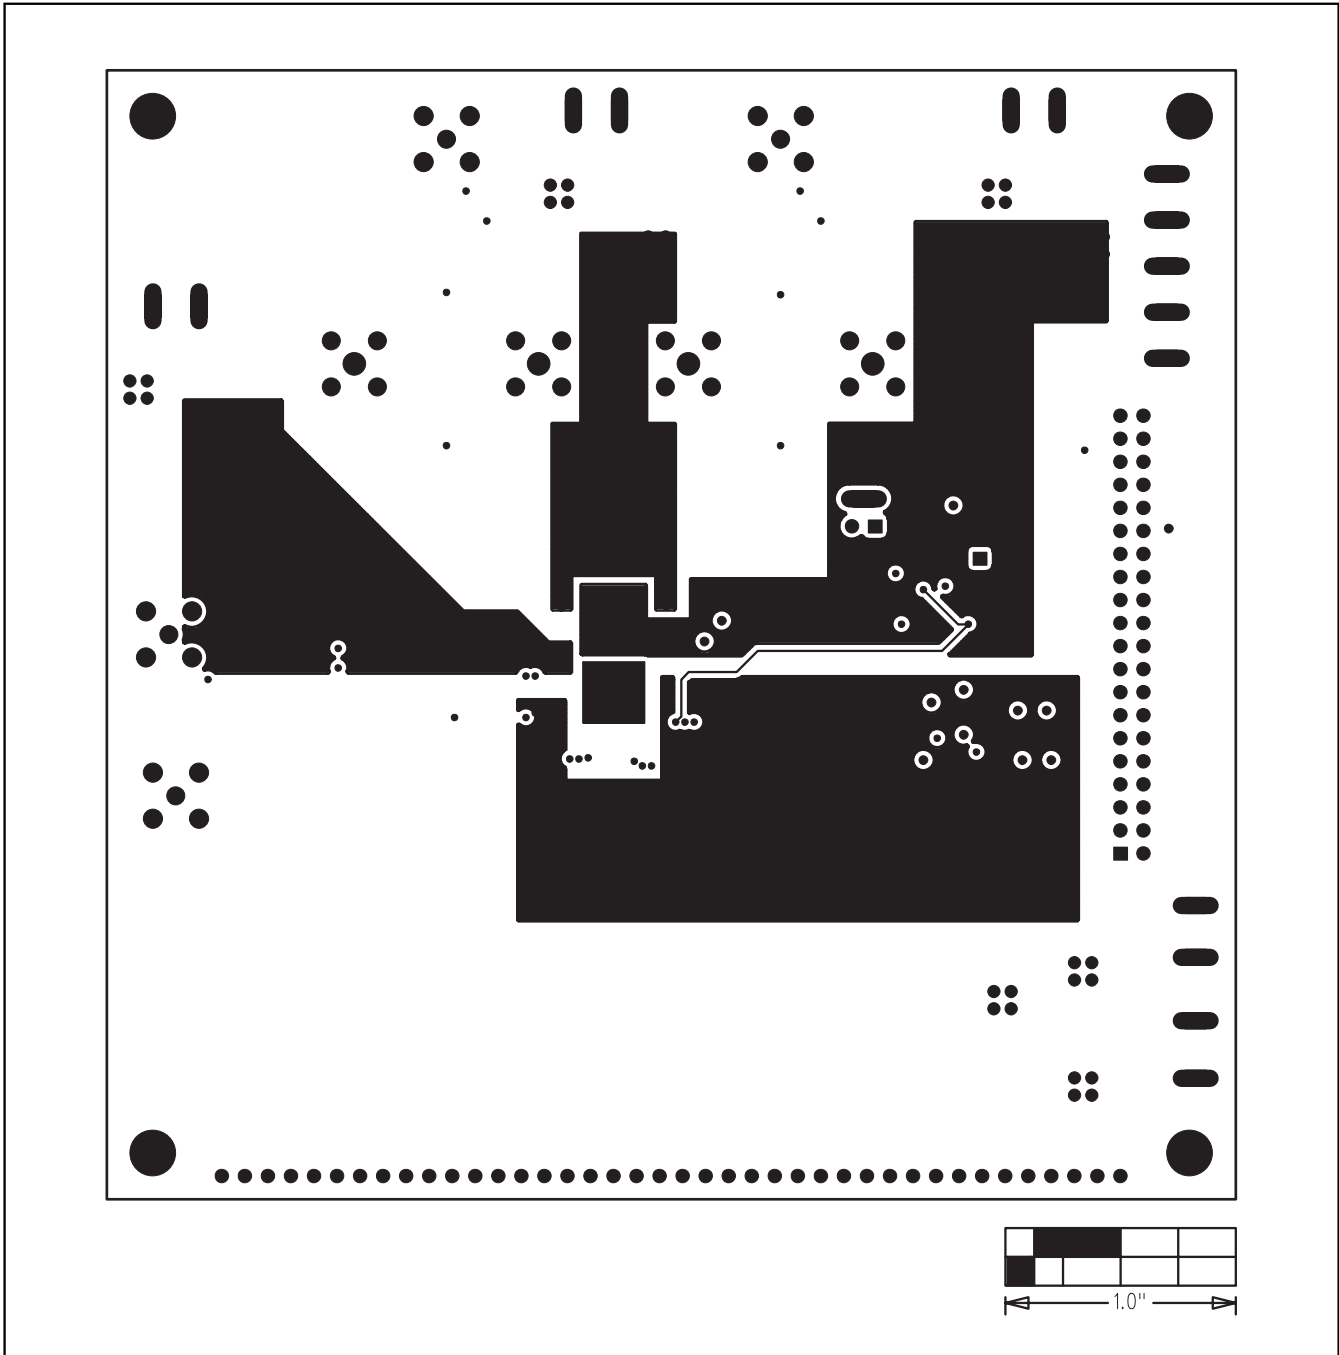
MAX5893/MAX5894/MAX5895 EV Kit PC Board Layout (Inner Layer 3)—Power Planes
